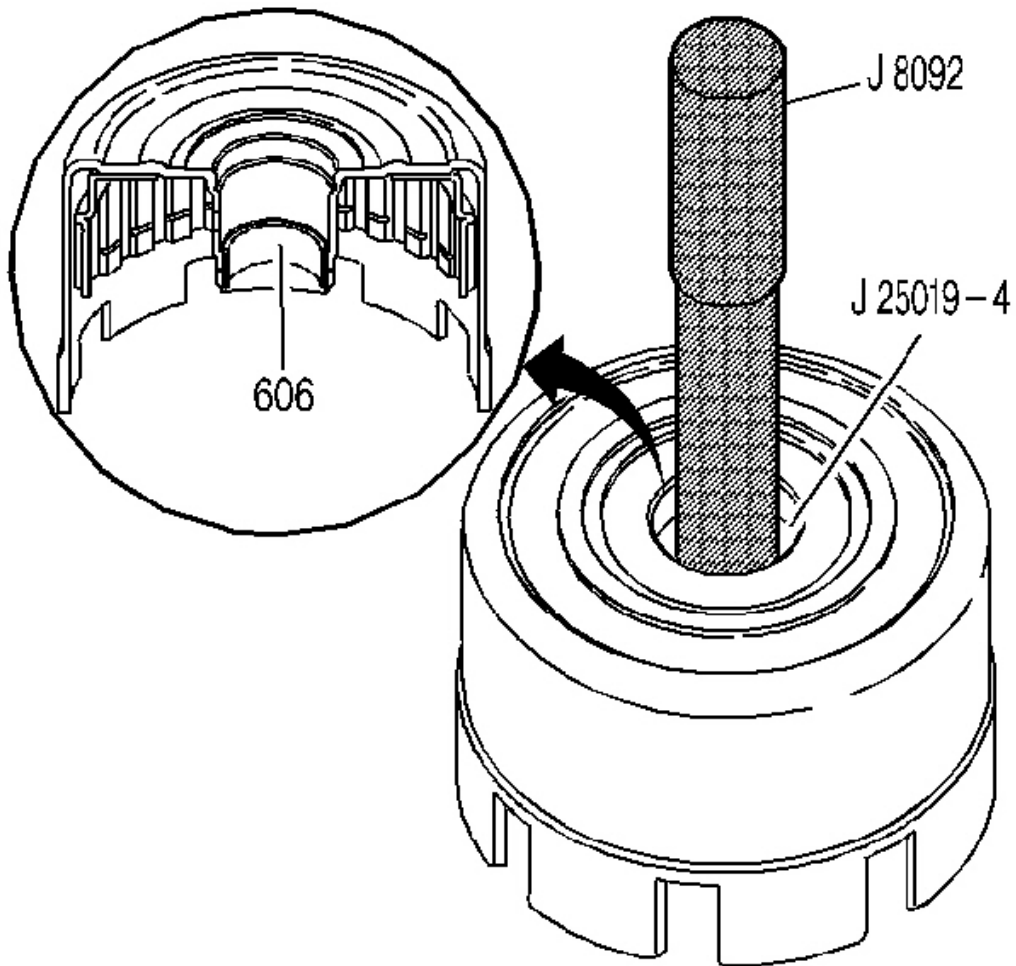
Locating Reverse Input Clutch Rear Bushing
